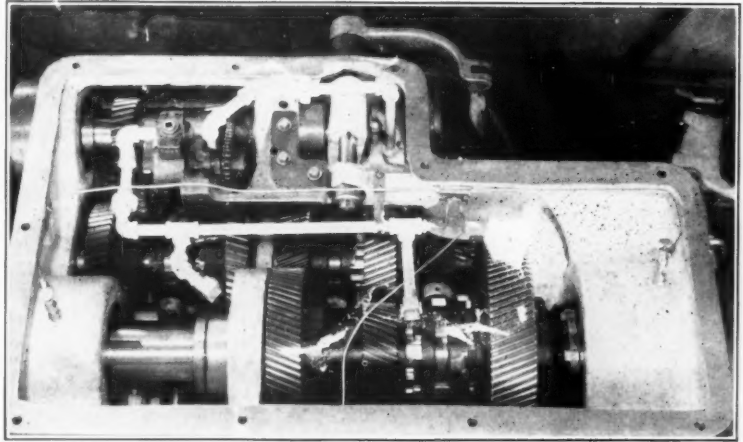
Top view of the gears of a Monarch lathe showing oiling facilities.
